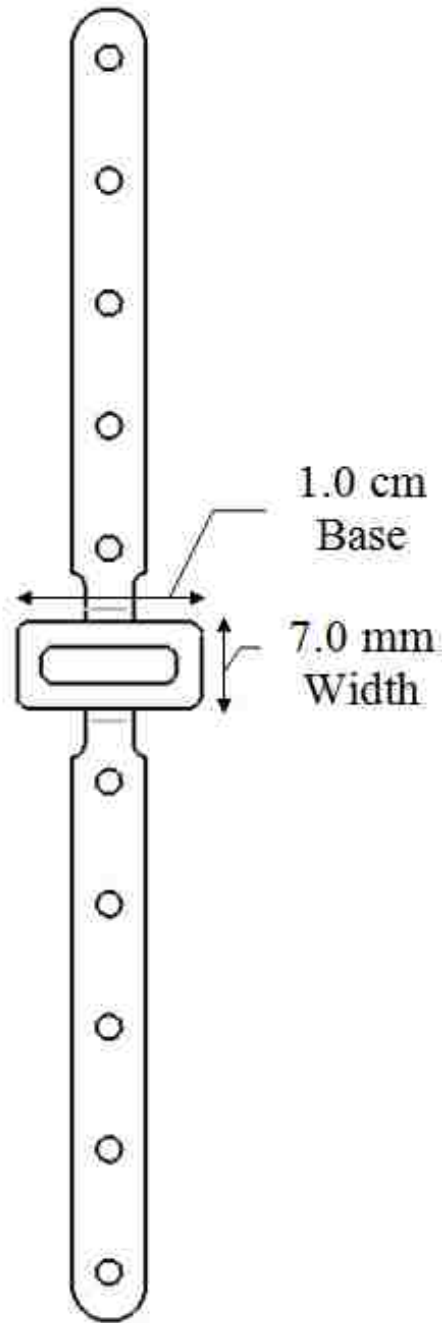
Top View. Bi-Cantilevered Drain/Cantilever composed of a Rectangular Drain and two Rectangular-shaped Cantilevers attached to the Base.
